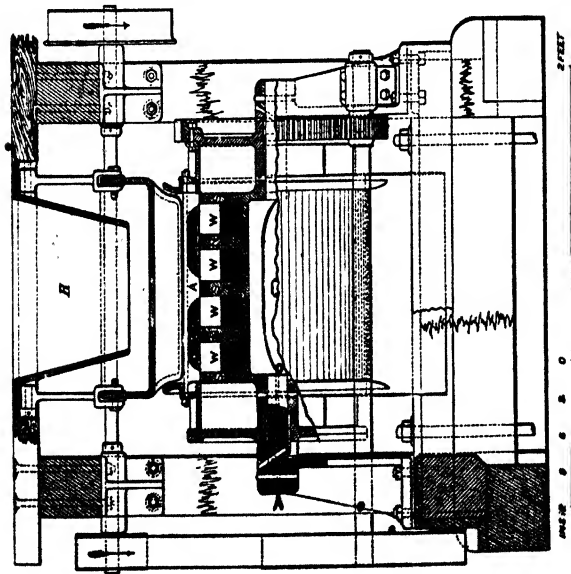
Wenström separator. Sectional longitudinal and end elevations.
